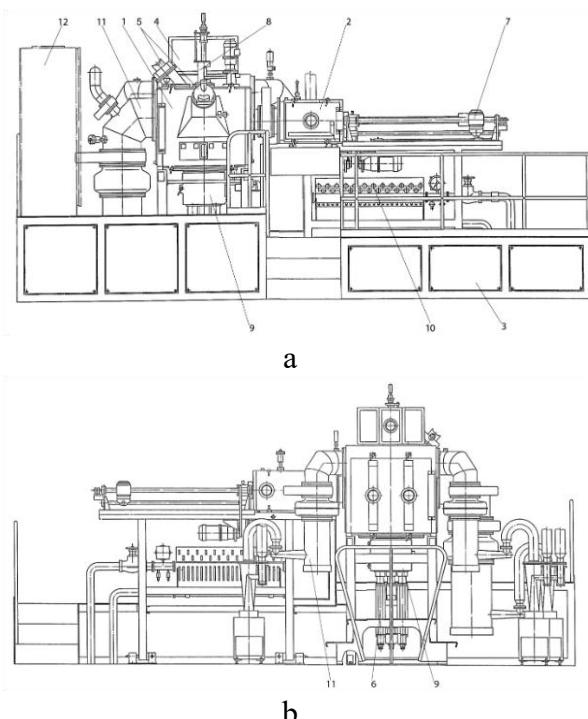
General assembly diagram of the L-2 unit: (a) front view; (b) rear view.
